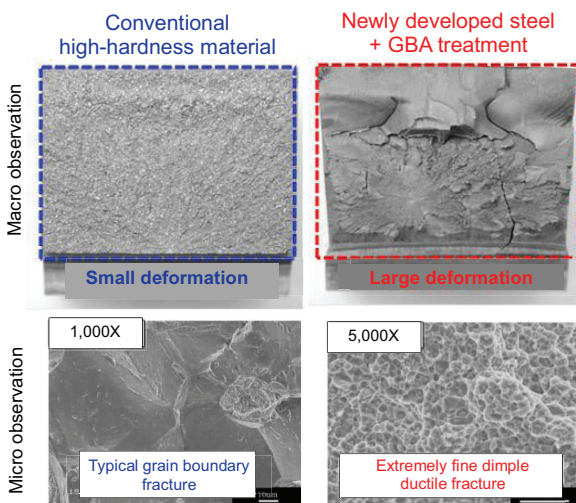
Observation of impact test piece fracture surfaces
